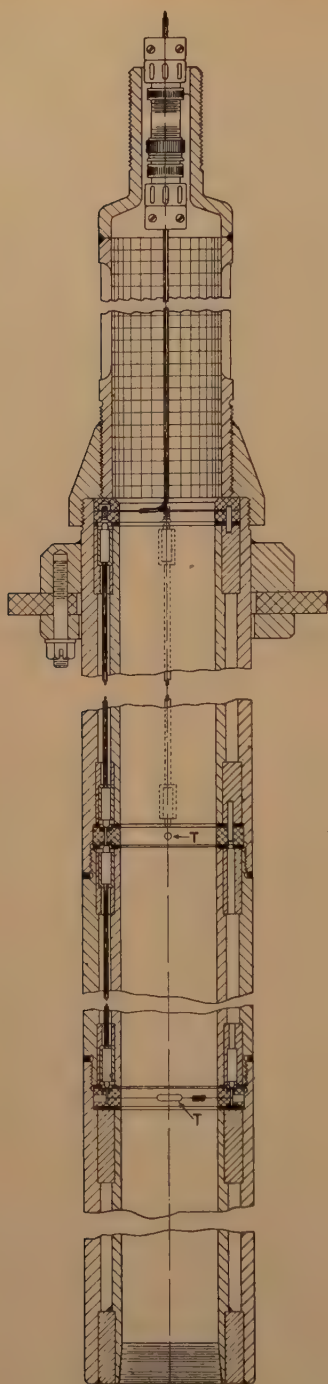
ASSEMBLY DRAWING OF FLOWMETER.
